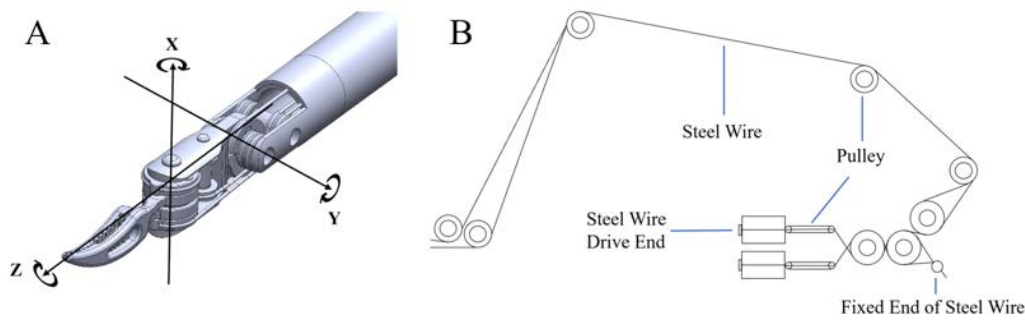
Needle Holder Structure. (A) Schematic Diagram of the Gripping Joint; (B) Steel Wire Drive System.
